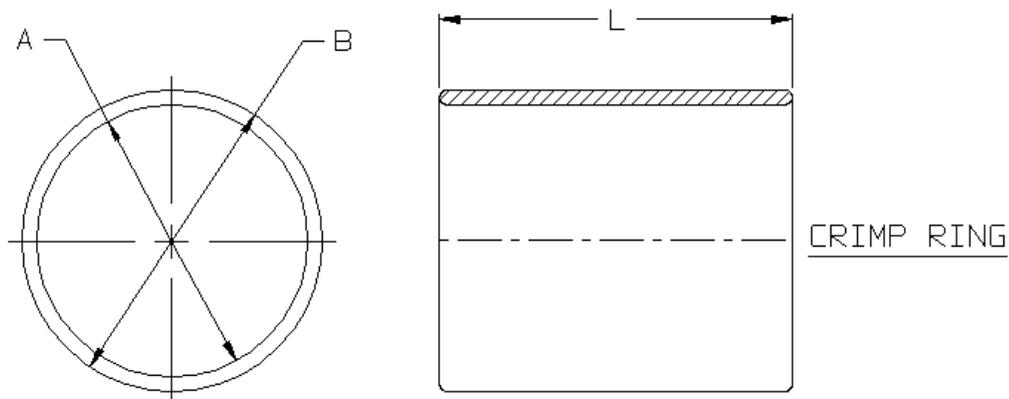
CRIMP RING CONFIGURATION AND DIMENSIONS
